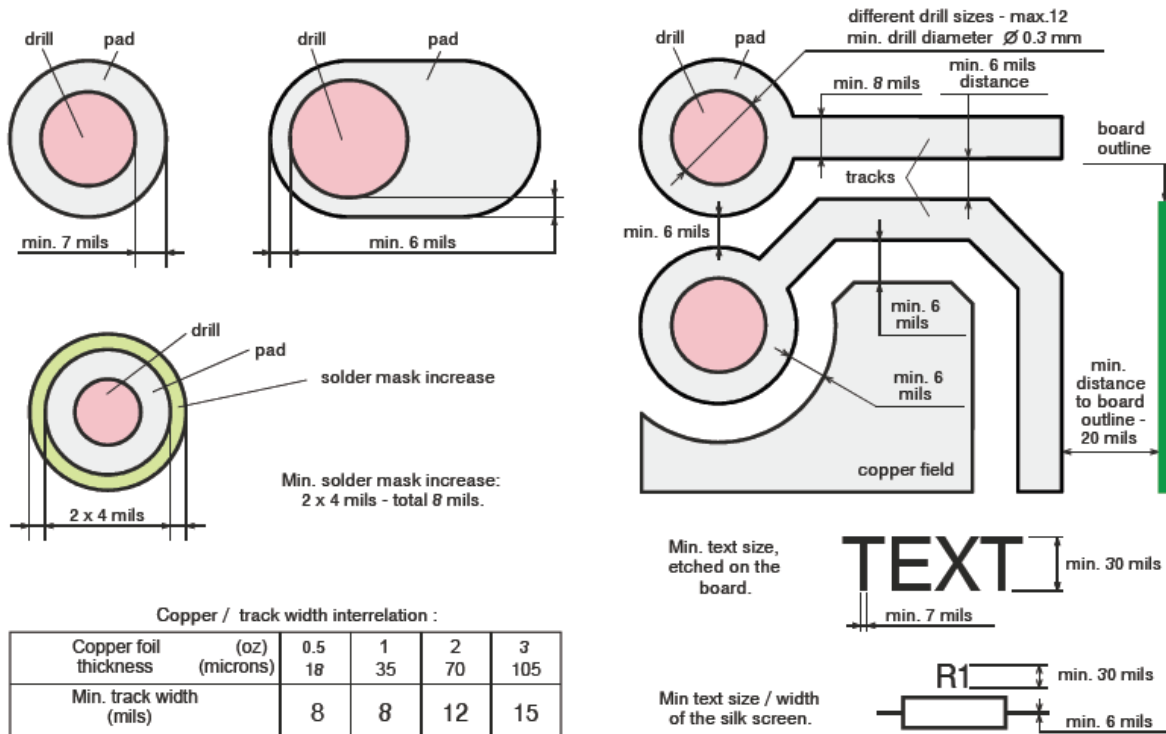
The PCB manufacturer (MICRON-20) capabilities for developing the PCB.
